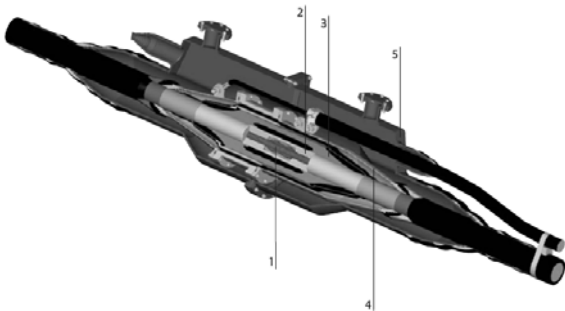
150 kV pre moulded joint, 1-conductor connection, 2-corona shield, 3-EPR pre moulded sleeve, 4-copper casing with insulating ring, 5-outer protection.
